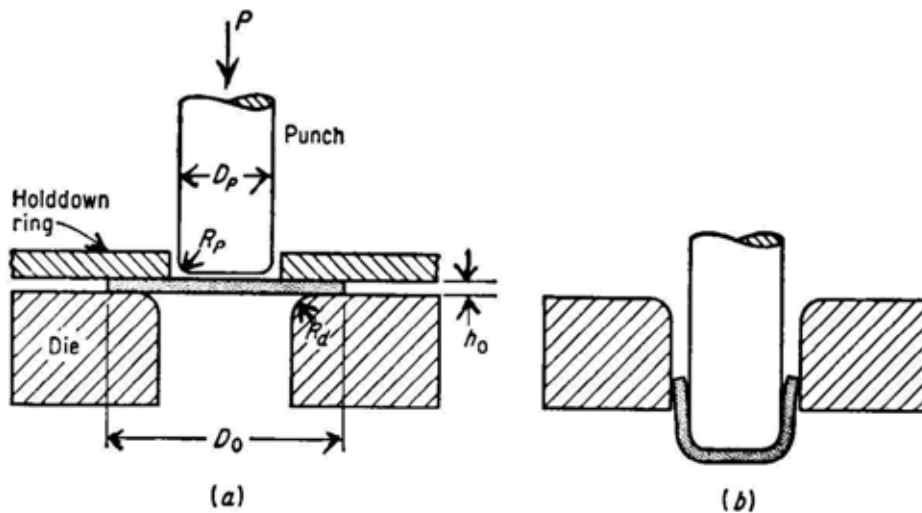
Deep-drawing of a cylindrical cup; (a) before bending, (b) after drawing.
